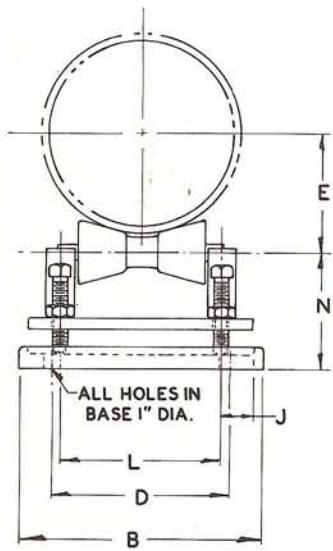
Chair No.	Bare Pipe Size	Pipe Size of Covering Protection Saddles to be used with Fig. 40 Adj. Chair and Roll
